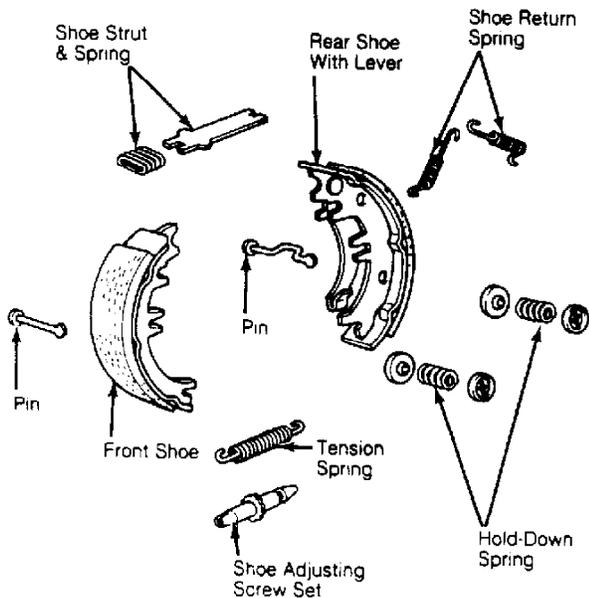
Exploded View Of Internal Shoe Parking Brake Assembly
